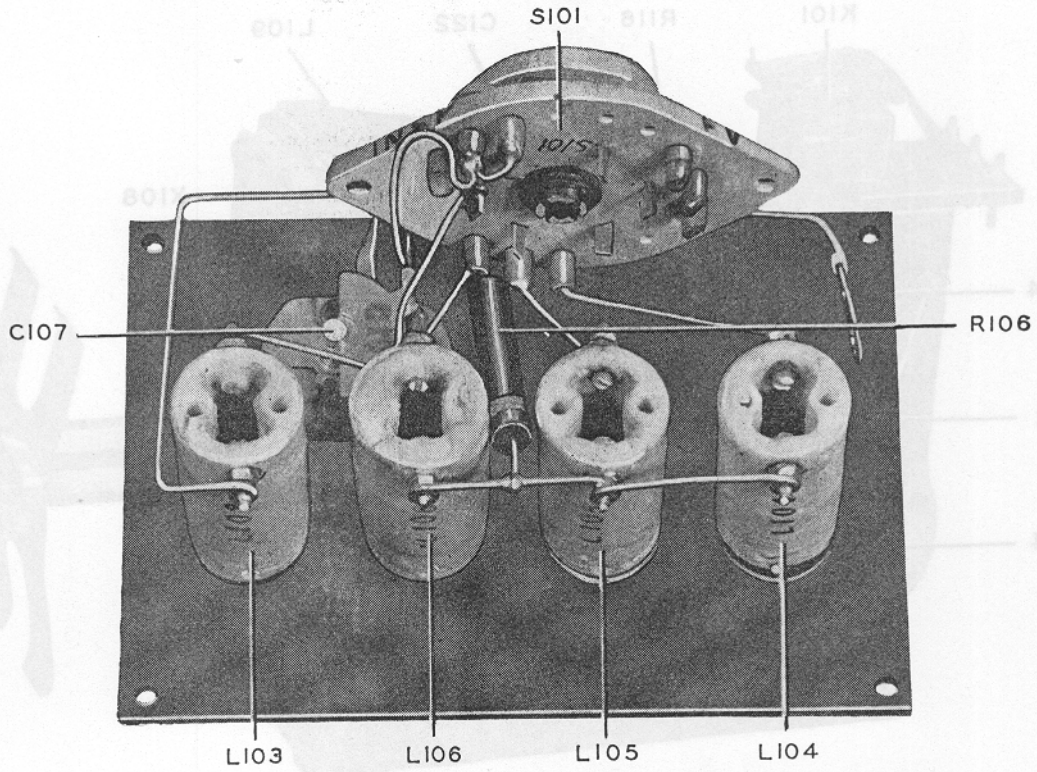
Transmitter Exciter Plate Tank Assembly—Top View
